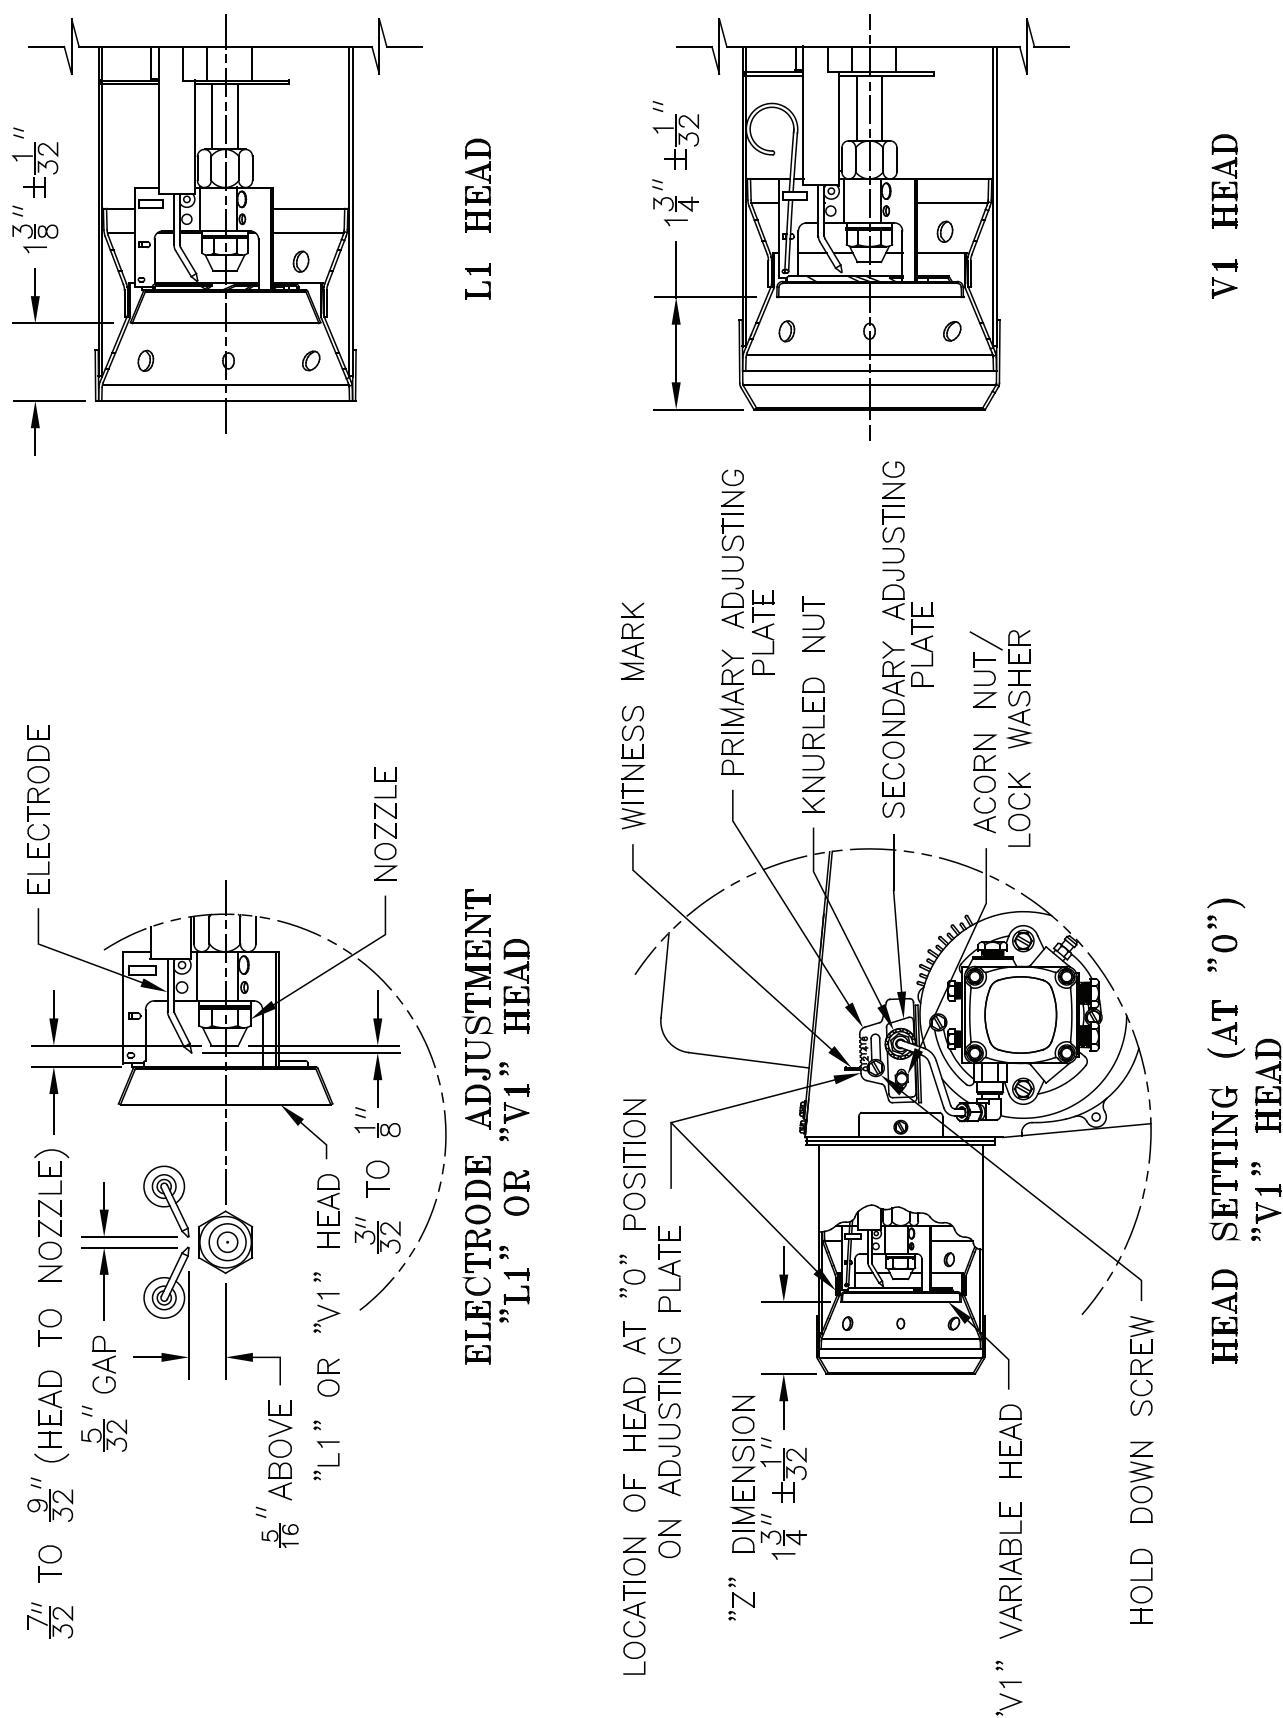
"L1" and "V1" Head Electrode Positioning and Gun Setting (Beckett AFG)
